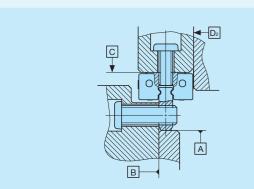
Reference mounting surface of LWL1···Y and typical mounting structure ①
